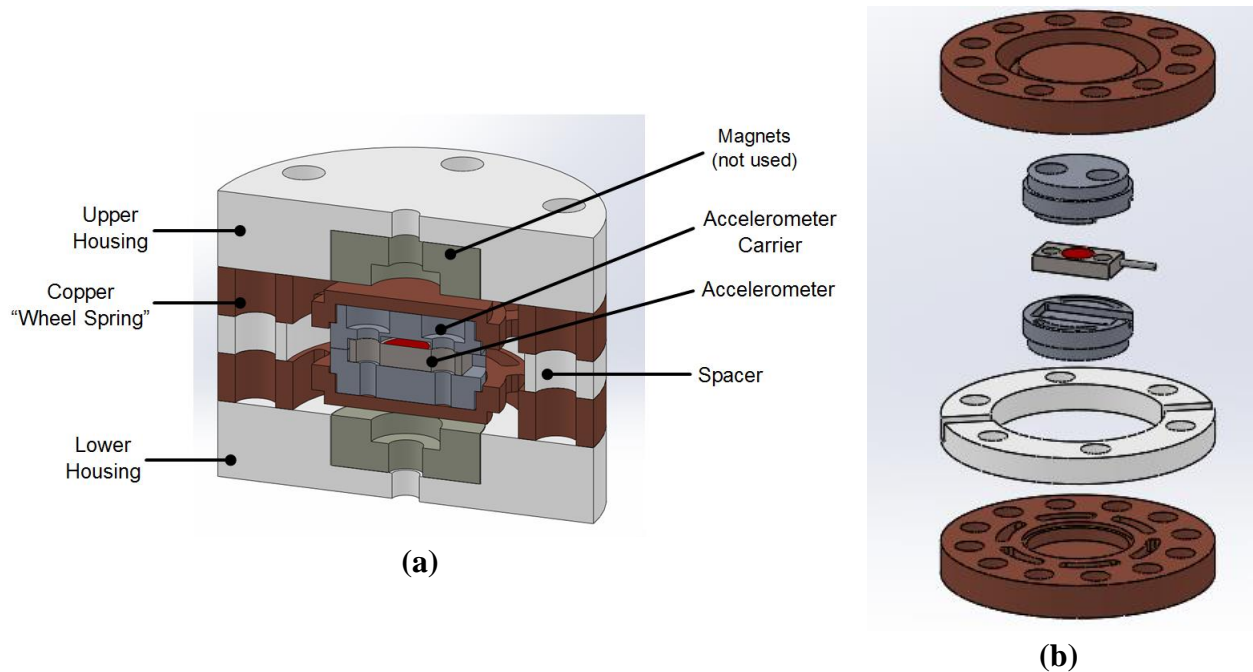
Labeled Section (a) and Exploded (b) Views of Wheel Mount
